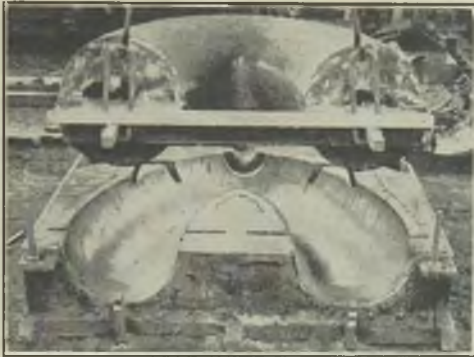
CORE READY FOR INSERTING IN THE MOULD.
